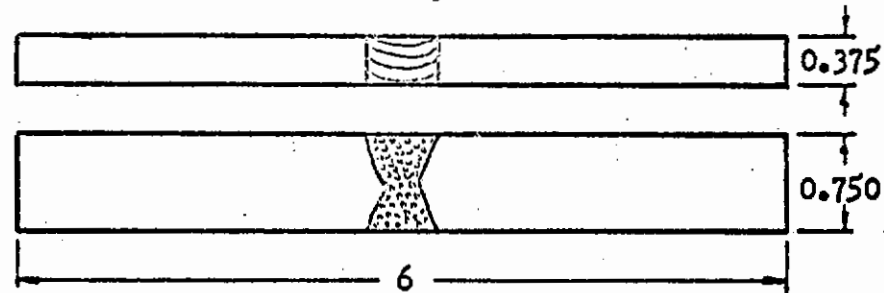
WELD-JOINT DESIGNS AND WELDING PARAMETERS
